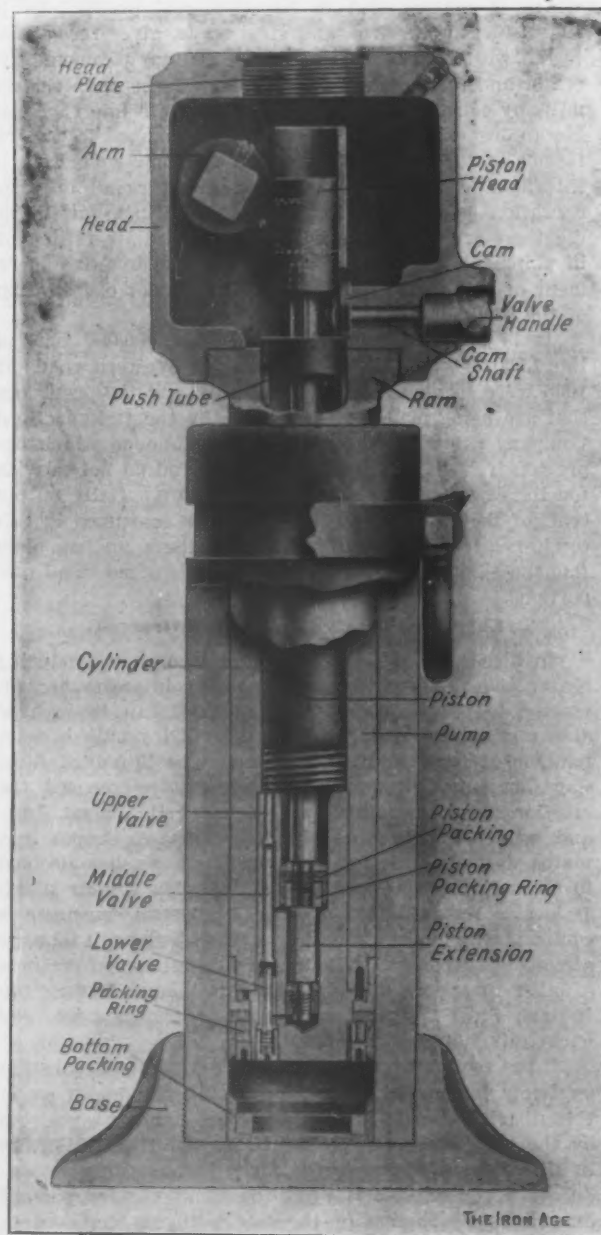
Sectional View of the 1906 Dudgeon Jack.
